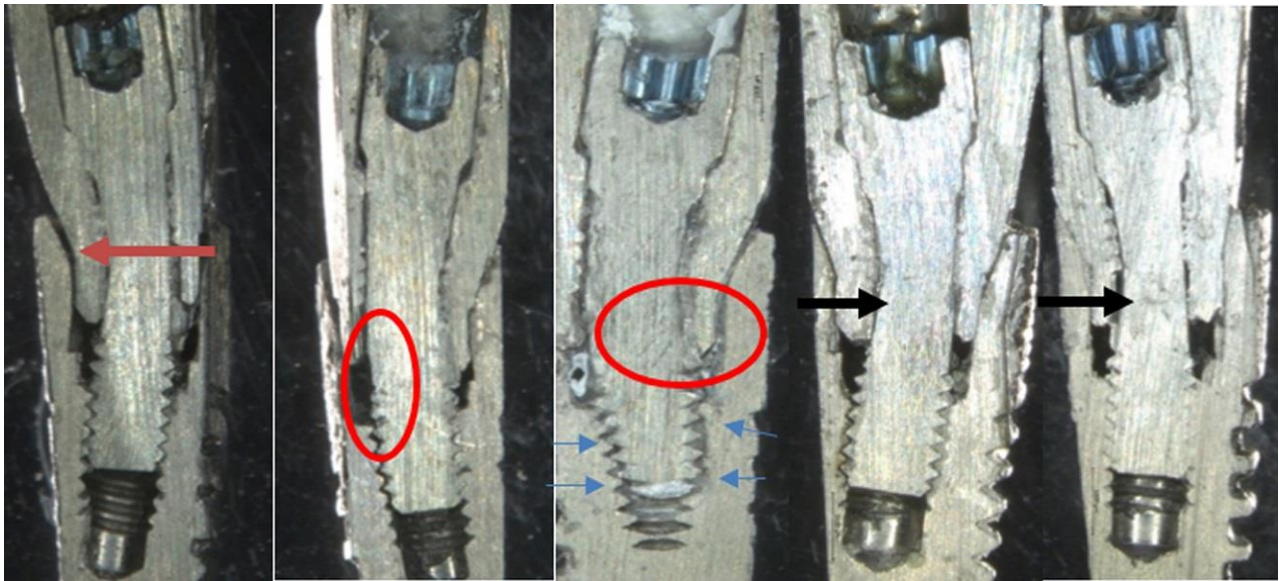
Different forms of abutment and screw fracture failure mode revealed by Stereomicroscope (magnification 1000  $\mu\text{m}$ ). A) Horizontal fracture (side view), B) Vertical fracture (top view).
